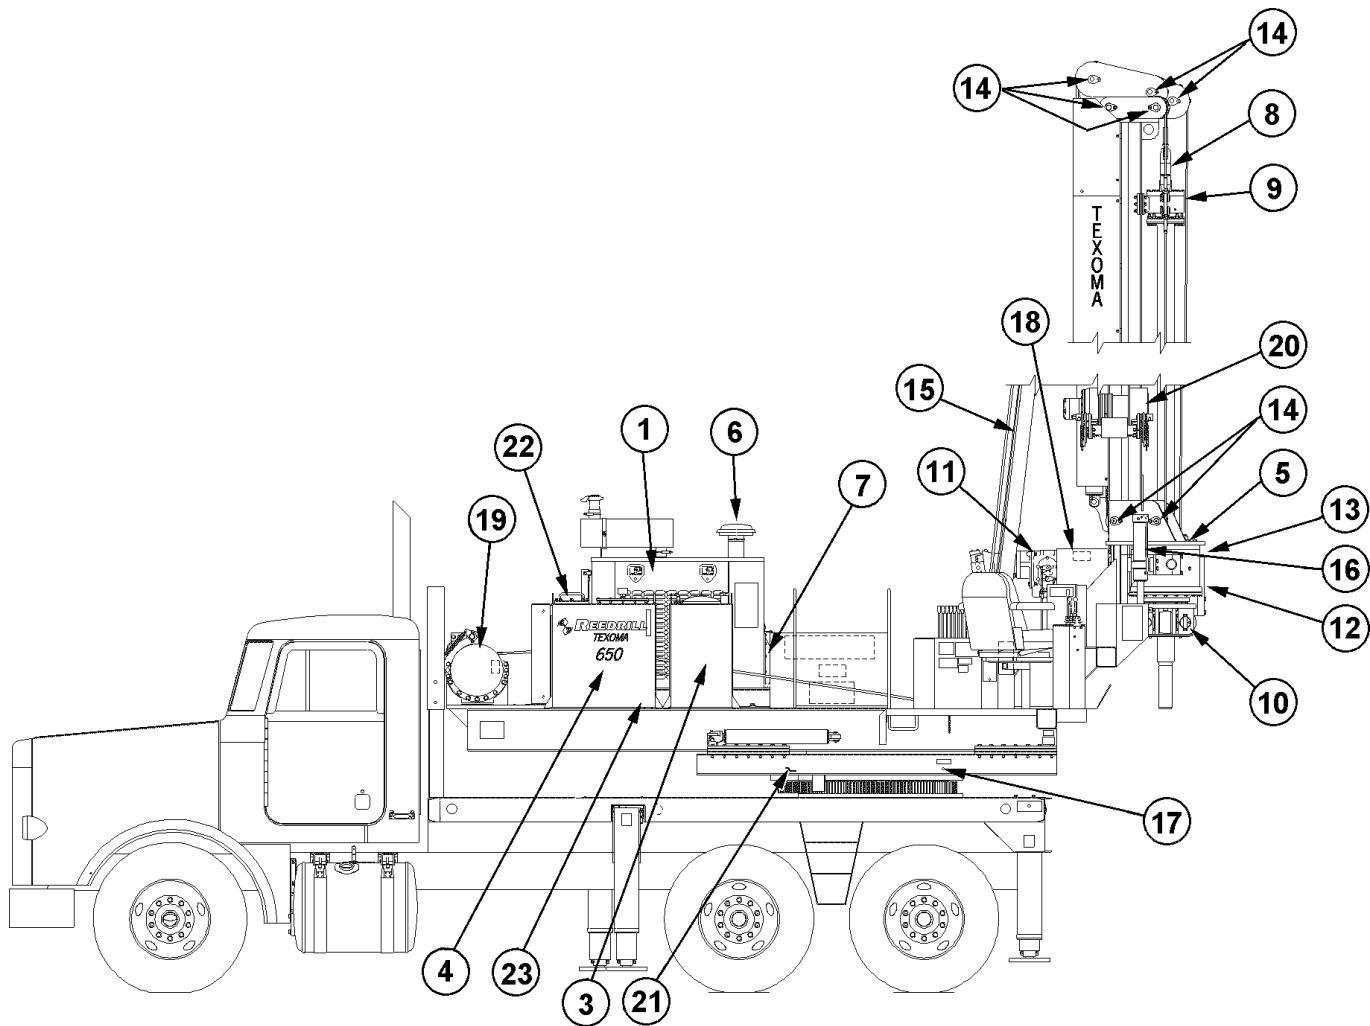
Model 650 Lube Points (ref. 420715)
